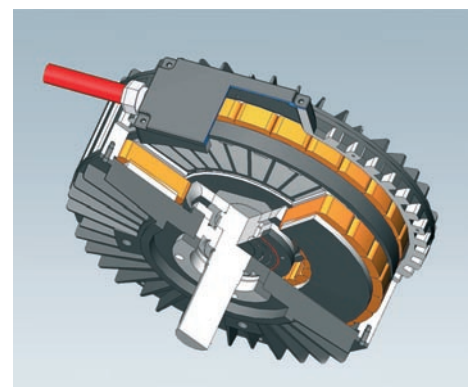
Principal design of a brushless electric motor of PERM Motor GmbH: stator and rotor
